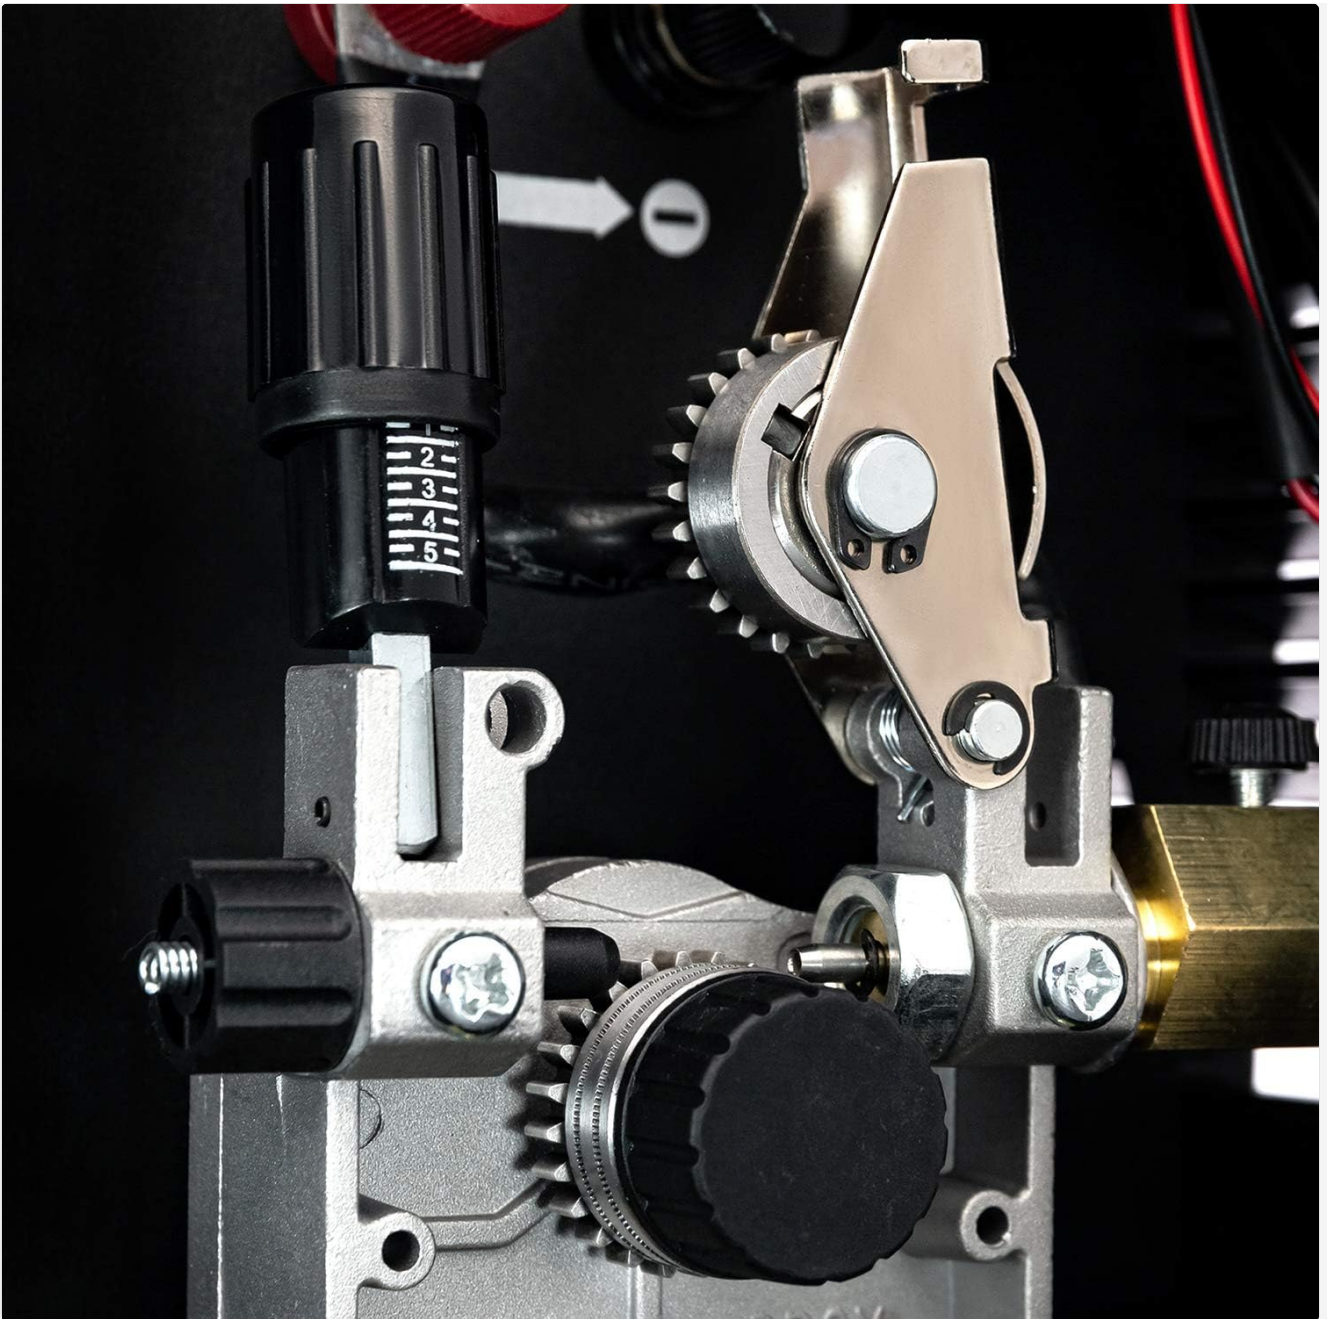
Wire Feeder Mechanism. A detailed view of the double-gear drive wire feeder, showing the rollers and tension adjustment for precise wire feeding.
